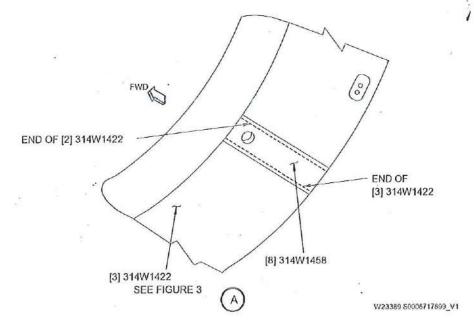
Inlet Cowl Skin Identification - GE90-100 Series Engine - Sheet 1
